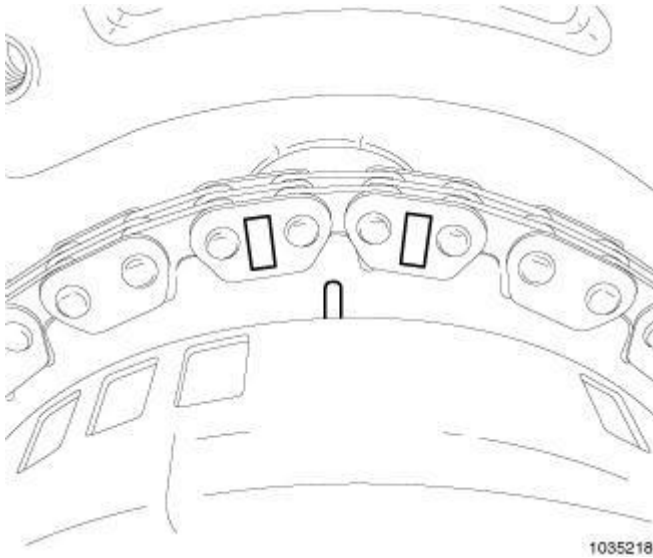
Aligning Timing Chain & Camshaft Phaser Marks
